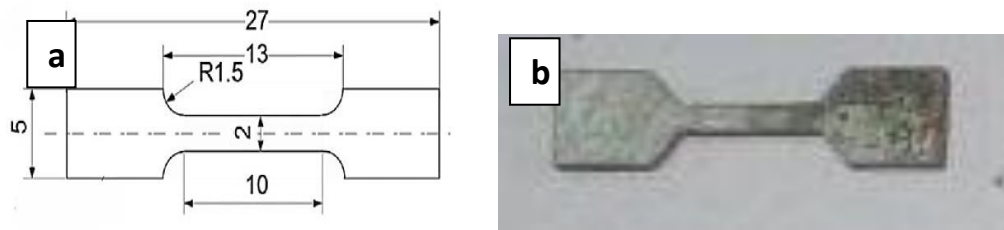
Tensile specimen (a) ASTM E8 standard and (b) Specimen cut from a composite sample.
